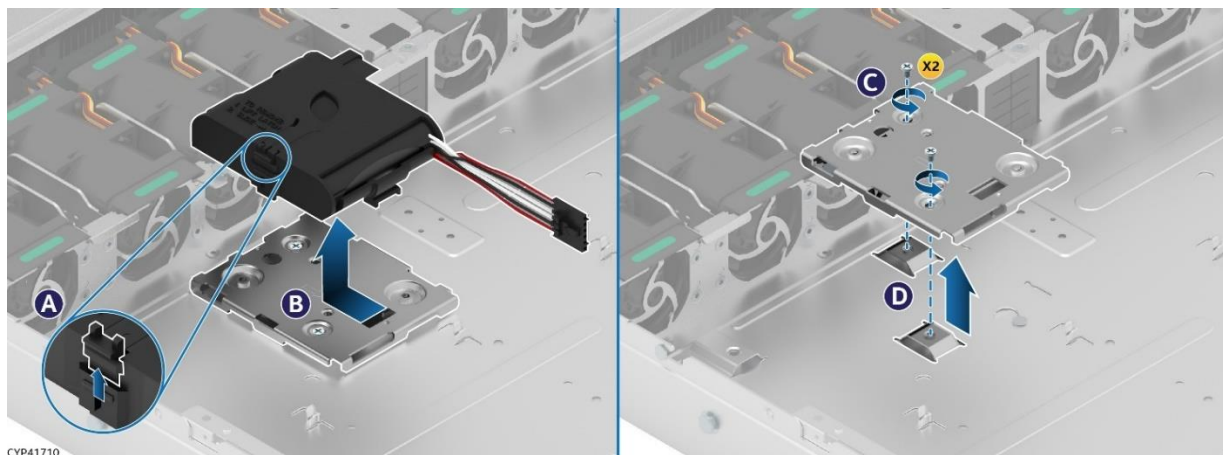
Intel® RMFBU Mounting Bracket Removal - Chassis
